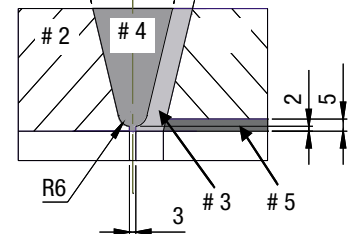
Materials and weld configuration of welds in the NESC-III inspection trial component
